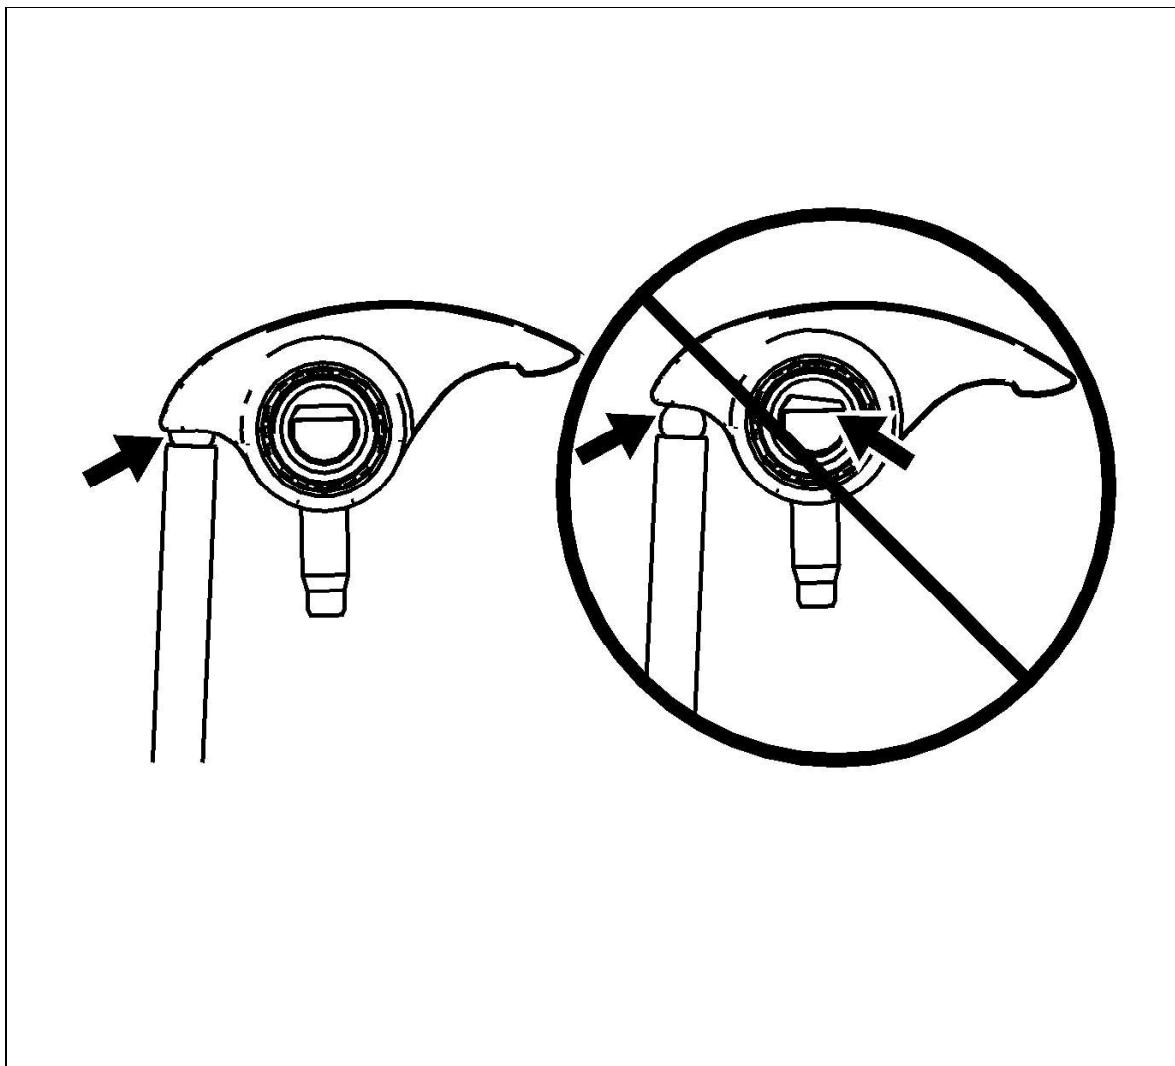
Valve Rocker Arm And Bolt Assembly And Pushrod
